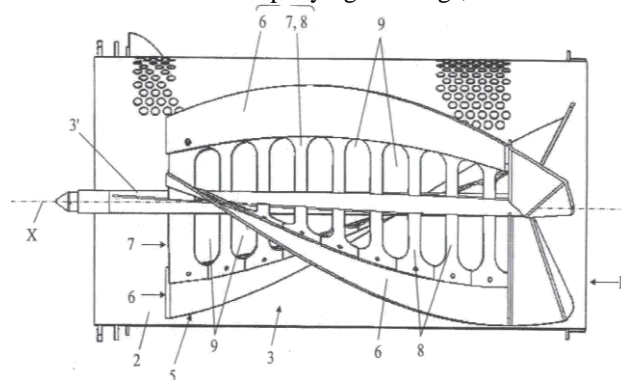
Is a side elevation view partly in section of a tree or drummer destemming mounted in a cage with a perforated stemmer.
